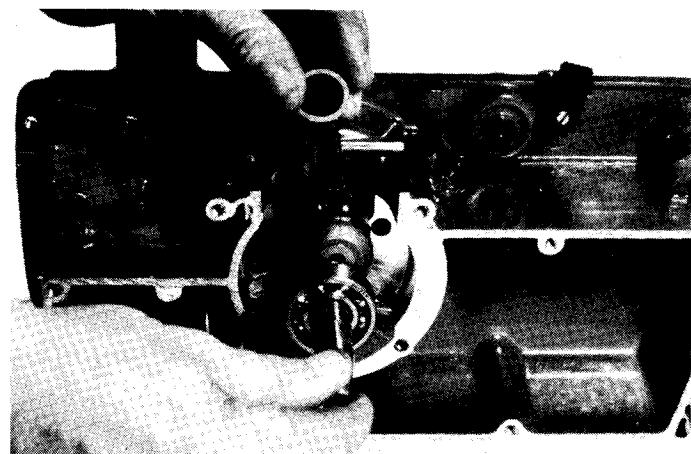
Slide in the crankshaft. The oil pump must not be fitted in the engine block when the crankshaft is installed.
